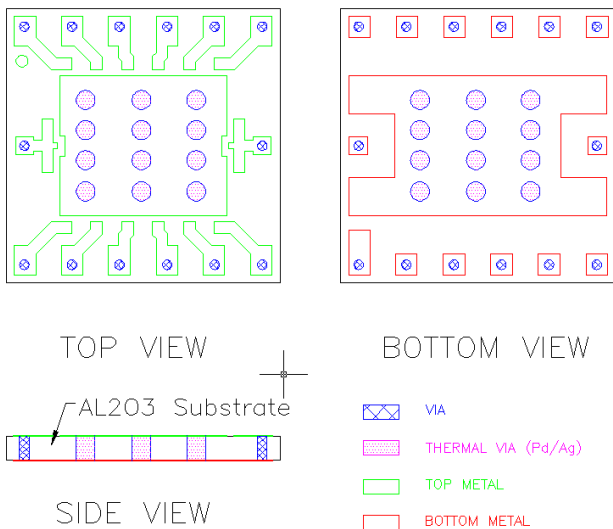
Package design for LNA. The top, bottom, and side views are shown. Via holes replace the heat sink since little thermal dissipation is needed.
